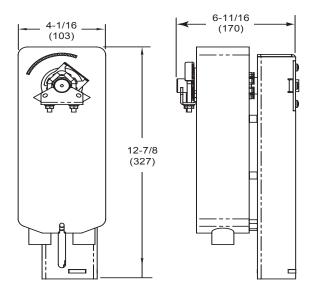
Mx41-715x-220 Actuator/Linkage Assembly
